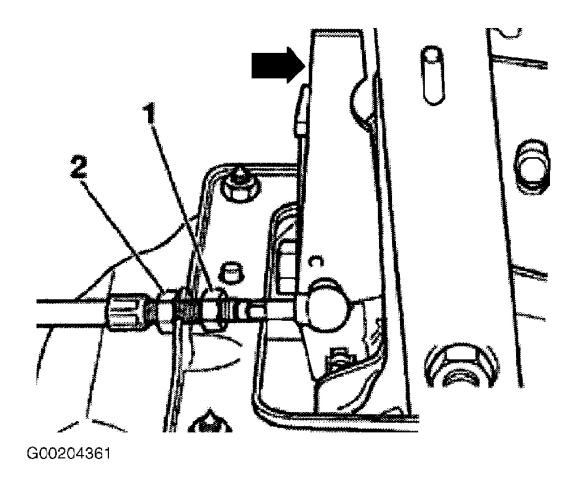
Adjusting Locking Cable Courtesy of VOLKSWAGEN UNITED STATES, INC.
